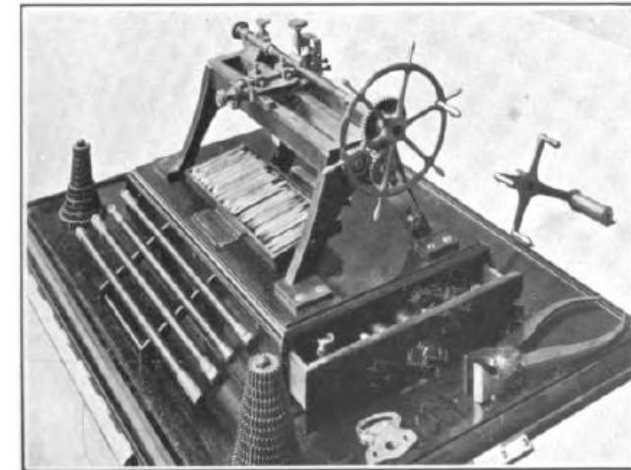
MAUDSLAY'S SCREW-CUTTING LATHE
